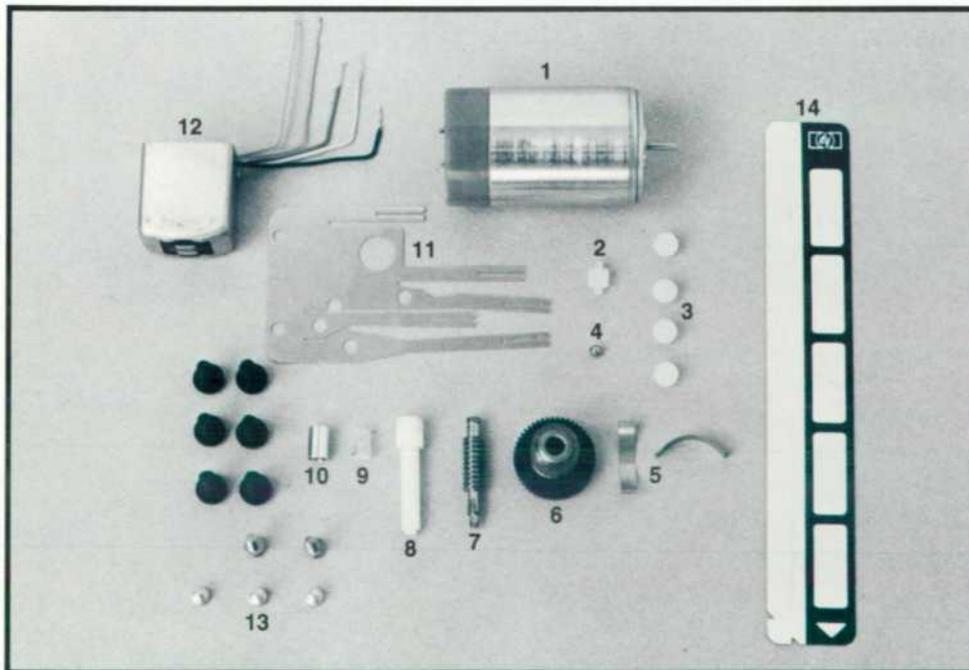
HP-65 card reader parts: 1. Motor 2. Idler roller 3. Switch activation balls 4. Thrust ball bearing 5. Card side loading springs 6. Rubber drive roller and helical gear 7. Worm gear 8. Drive pin 9. Coupler 10. Coupler sleeve 11. Switch contacts 12. Read/write head 13. Self-tapping switch adjustment screws 14. Magnetic card, 7.1 cm by 1 cm.
